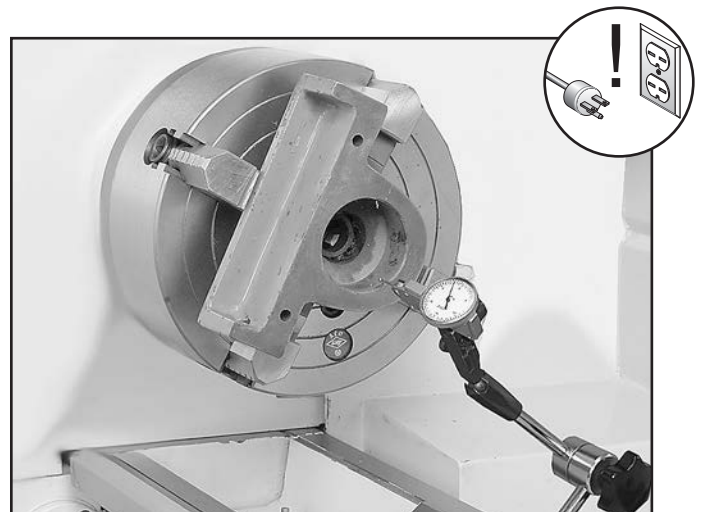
Example of using a test indicator to align a workpiece in a 4-jaw chuck.
